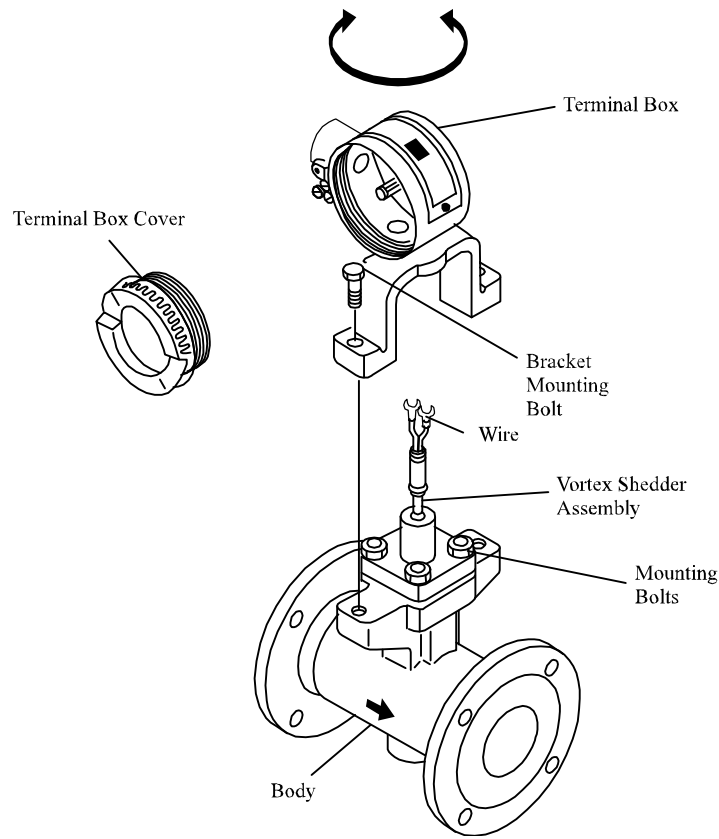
Disassembling and Reassembling the Vortex Shedder Assembly
